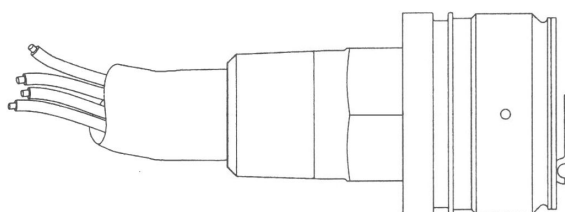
Drawing of a 057-76\* Electrical Snap-Switch.
